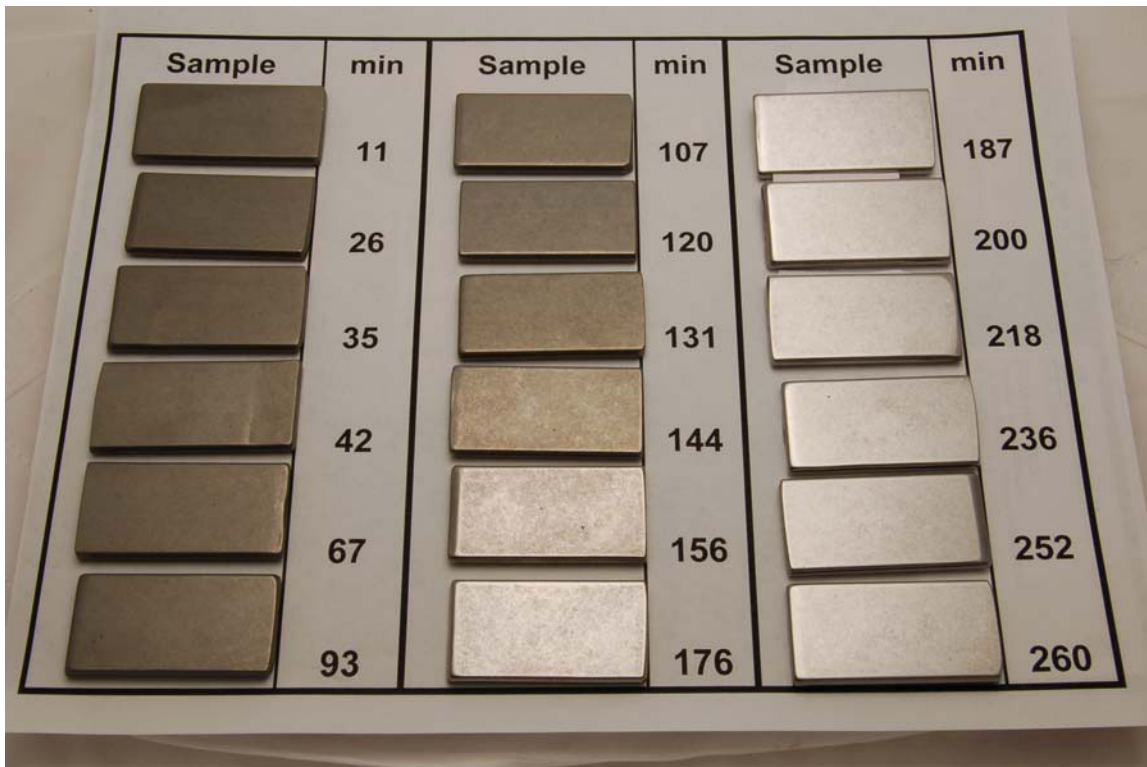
Visual appearance of strip steel test pieces during the CAVSF process.
